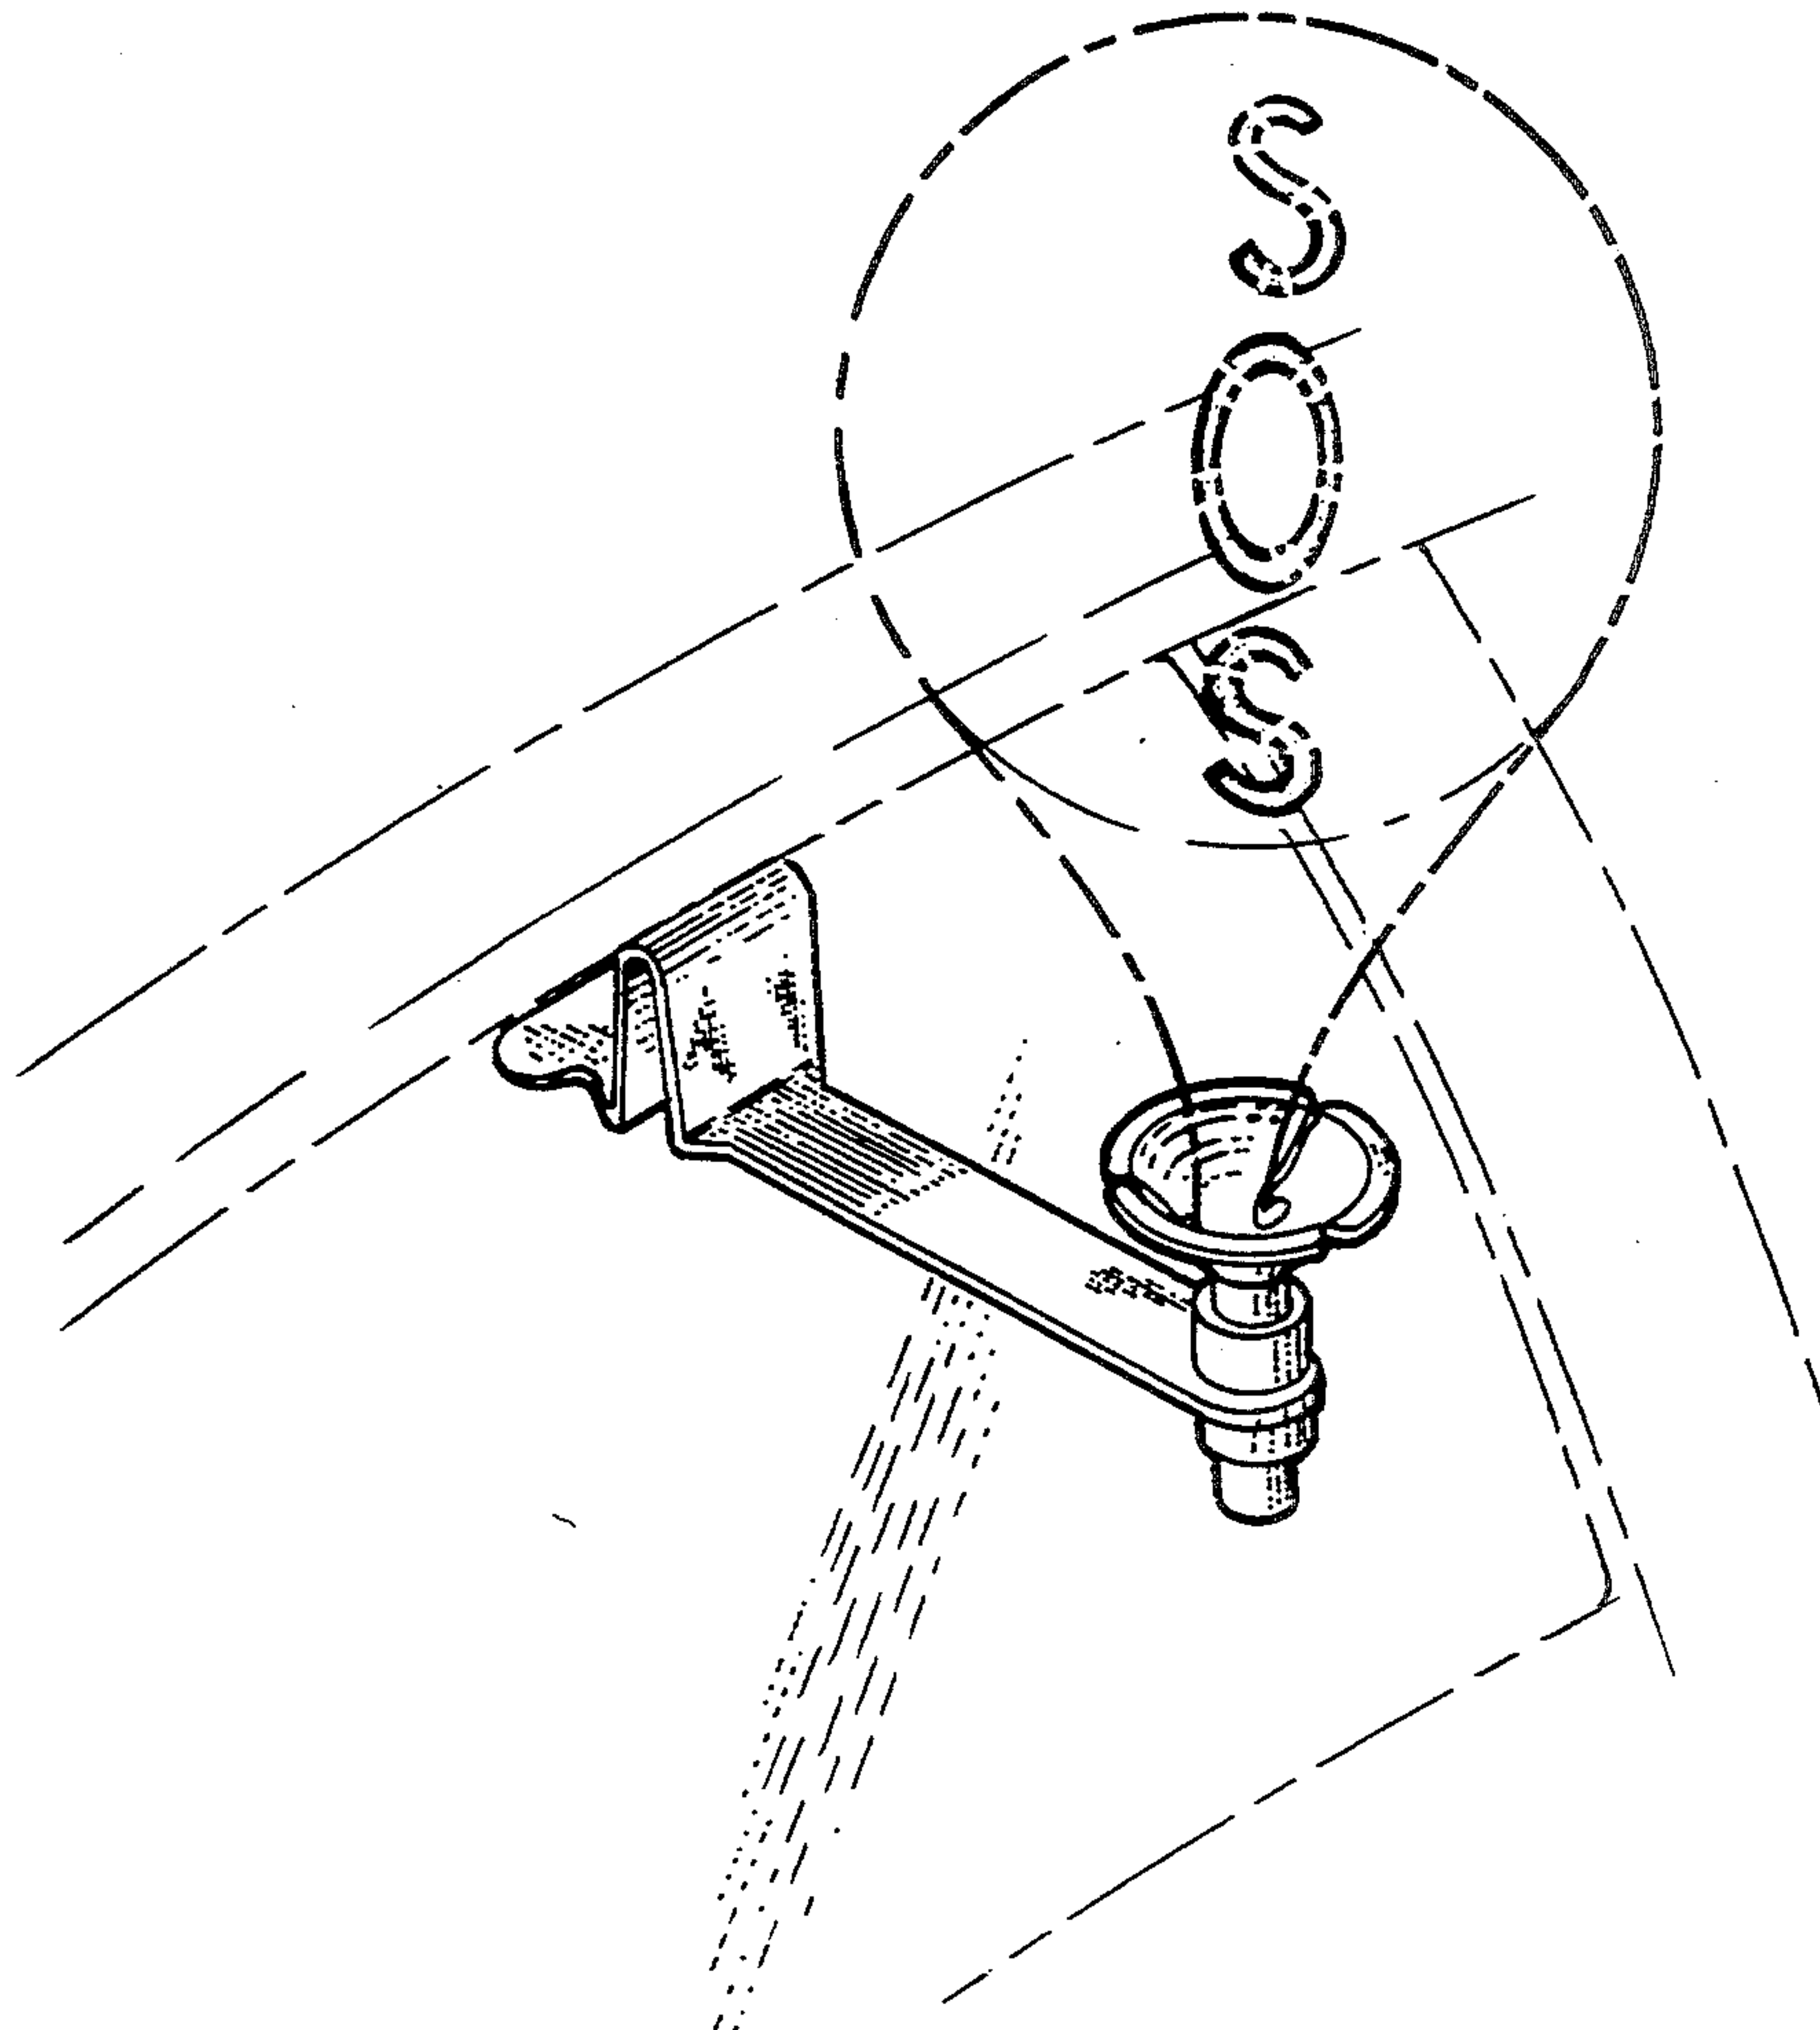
is a further perspective view showing the device in the "exploded" condition;
